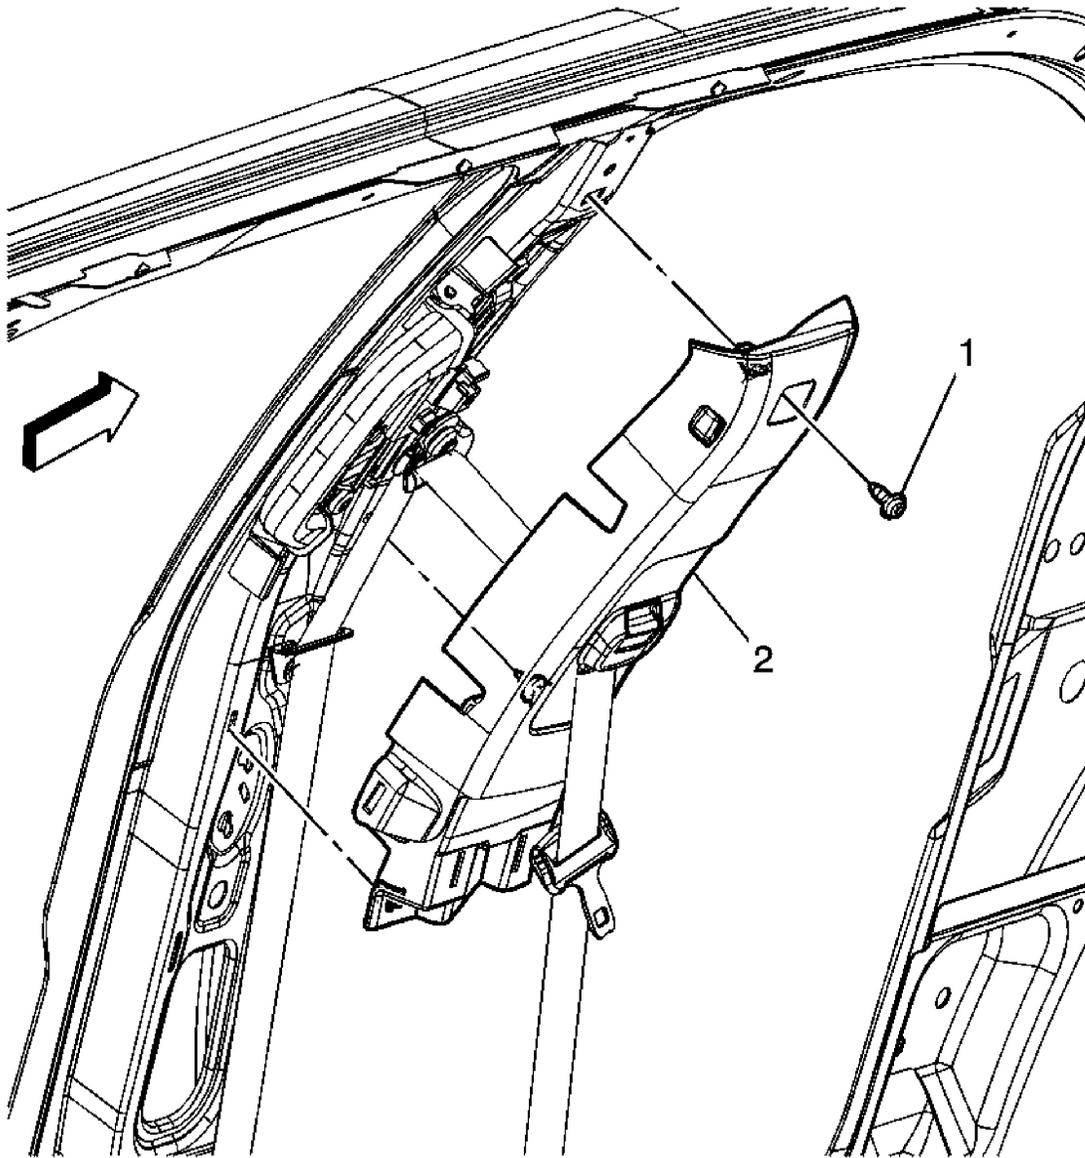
Identifying Center Pillar Upper Garnish Molding
